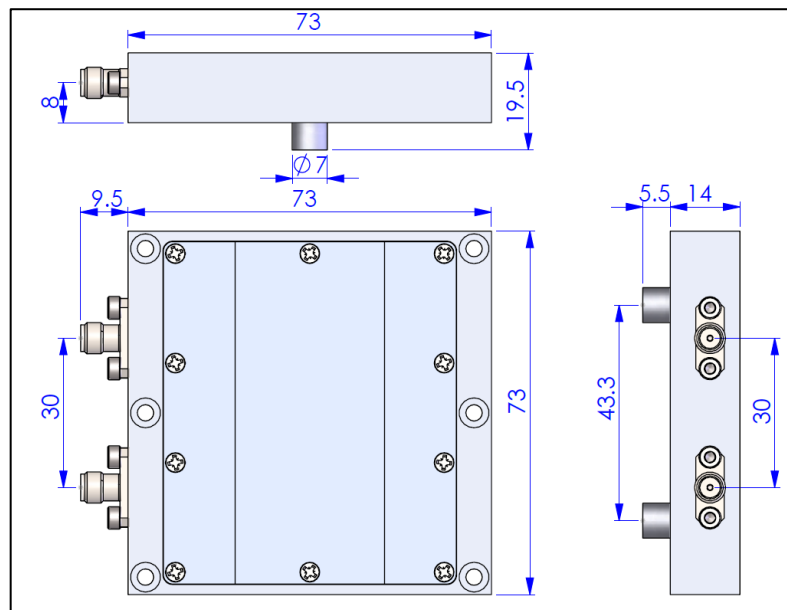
Basic BC111 dimensions (version with SMAf connectors). All dimensions are in millimeters.
